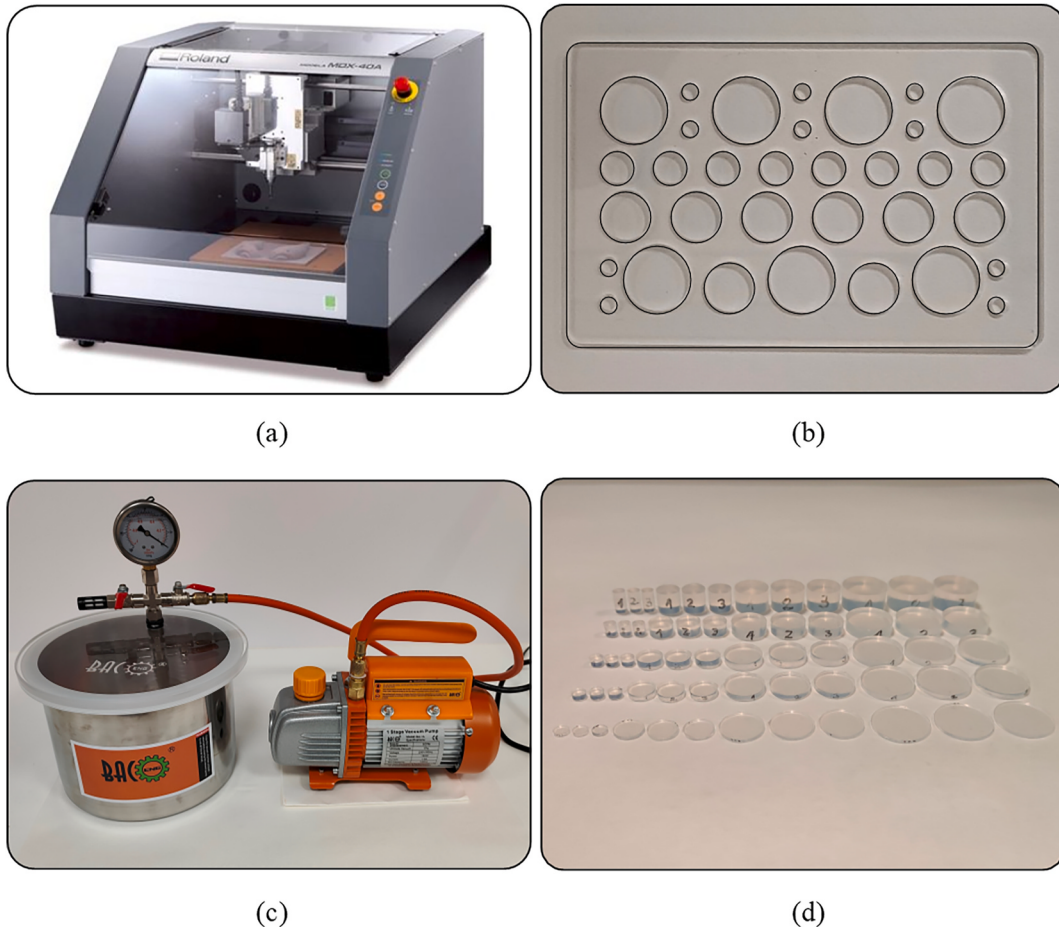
Equipment and materials used for the preparation of silicone rubber samples: (a) ROLAND MDX-40A 3D milling machine; (b) cylindrical mold made of PMMA; (c) vacuum chamber and pump and (d) silicone rubber samples of various sizes.
